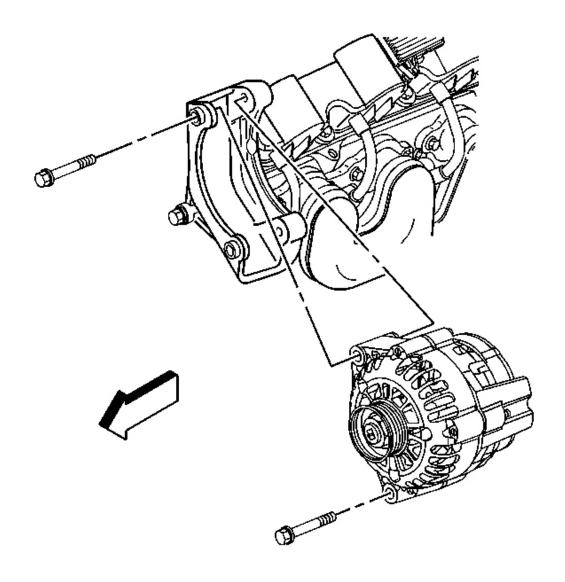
View Of Generator Bolts & Generator Courtesy of GENERAL MOTORS CORP.
